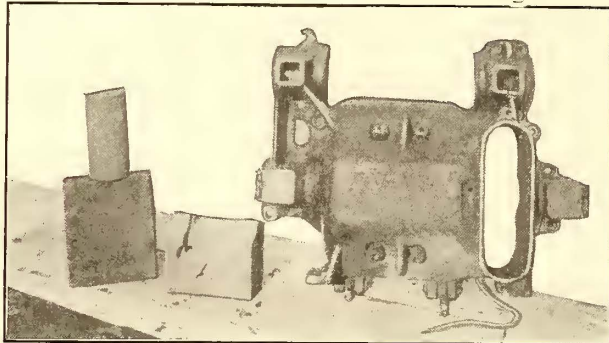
MOTOR FRAME WITH BROKEN LUG
